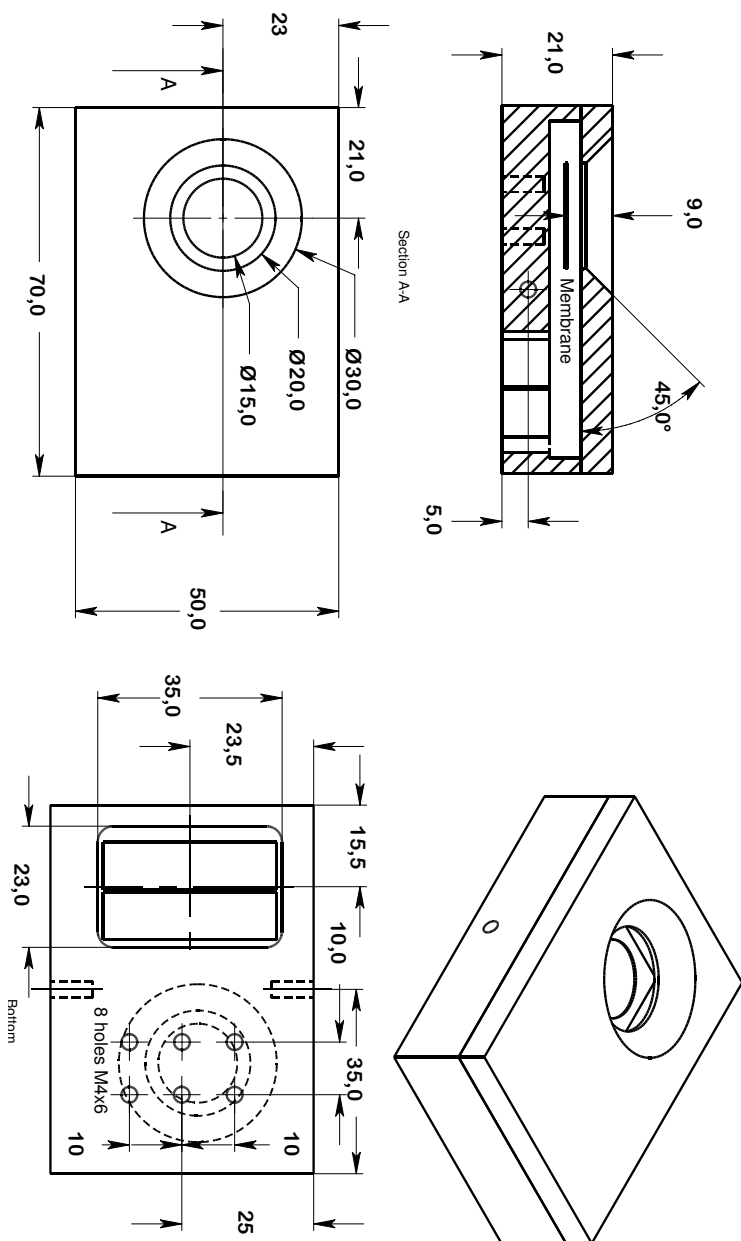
Technical drawing of the package and mounting holes of the 15mm 37-channel MMDM
